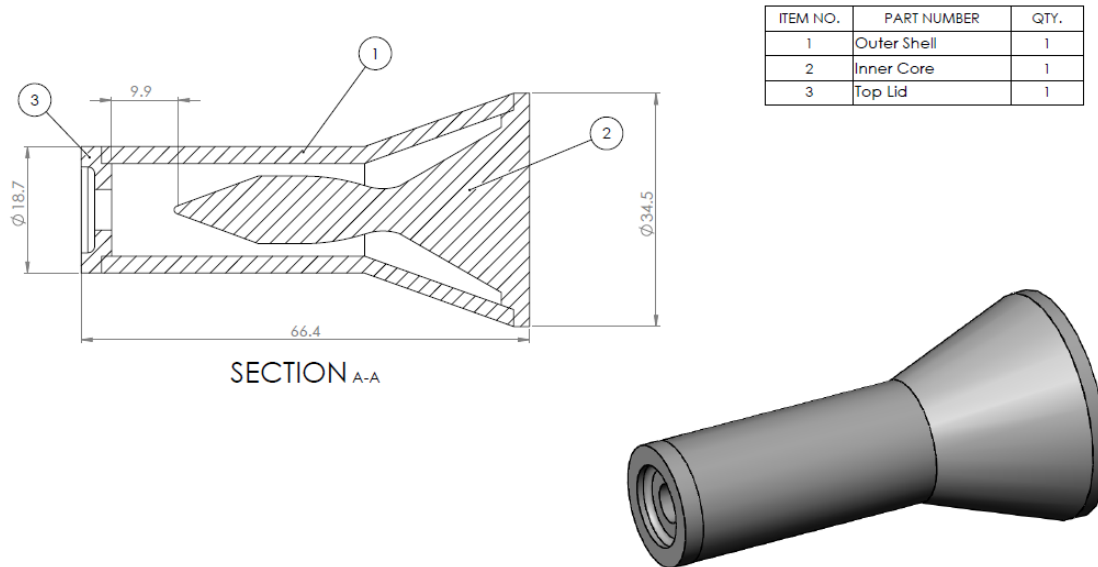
2D technical drawing of thruster combustion chamber assembly.
